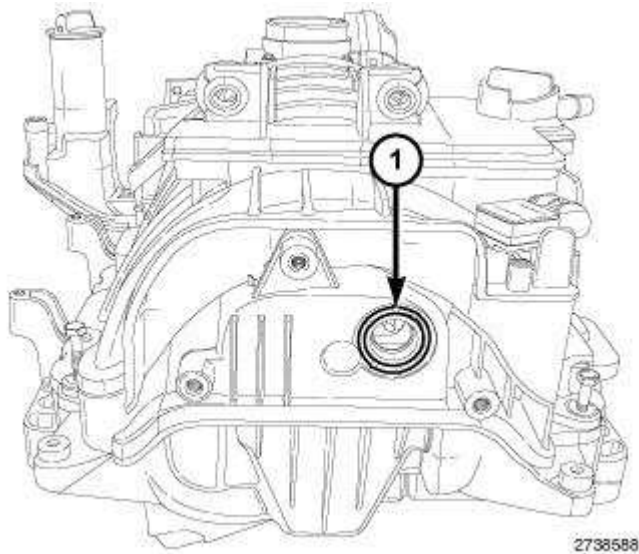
Short Runner Valve Actuator Rubber O-Ring Seal
